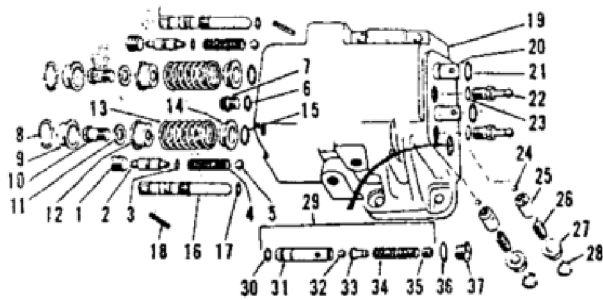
Exploded view of double spool remote control valve after production date of 12-70. Except for detent assembly (items 24 through 28), non-detent valves remain the same. The inboard spool, without detents, is always double acting and cannot be converted to single acting operation. Refer to Fig. 434 for legend.
